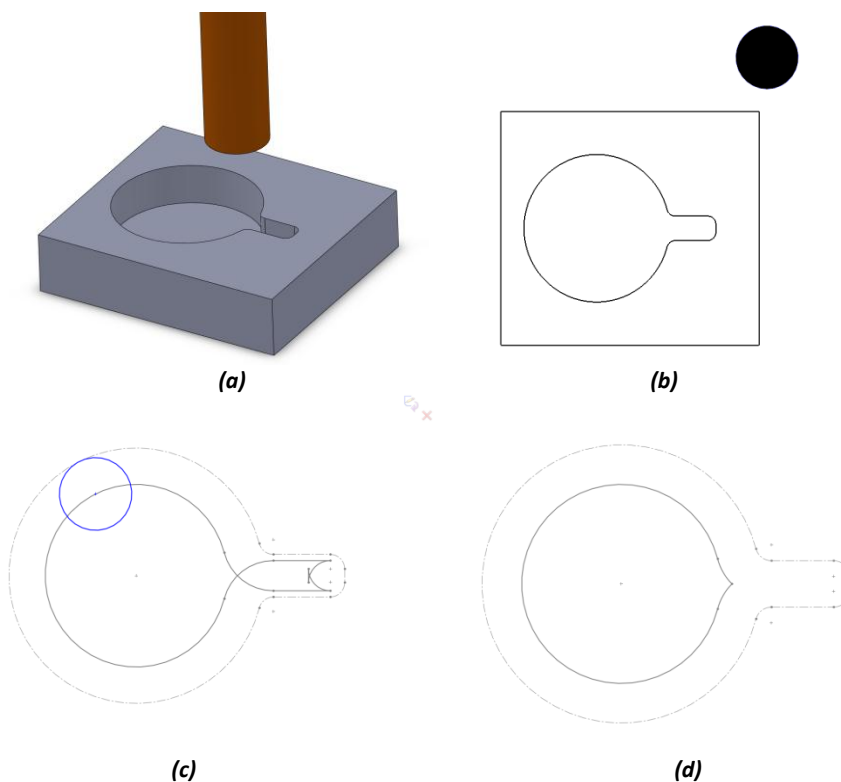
A pocket machining example. (a) The pocket to be machined and roughing tool. (b) Plan view of the pocket. (c) The mathematically correct offset curve defining the tool path; cutter geometry is overlaid in blue. (d) The actual desired tool path.
